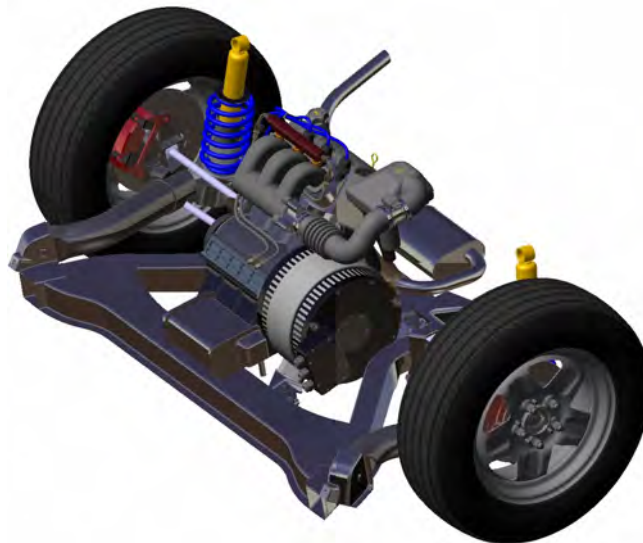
FSV-2 PHEV₄₀ rear suspension assembly
